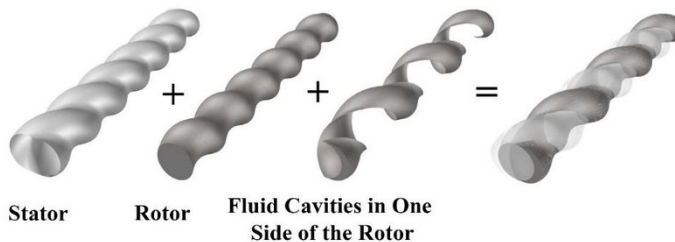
3D configuration of pump rotor, stator and fluid cavities in one side of the rotor [160]
